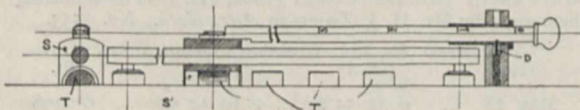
Showing construction of slider, spring contact bar, &c.
